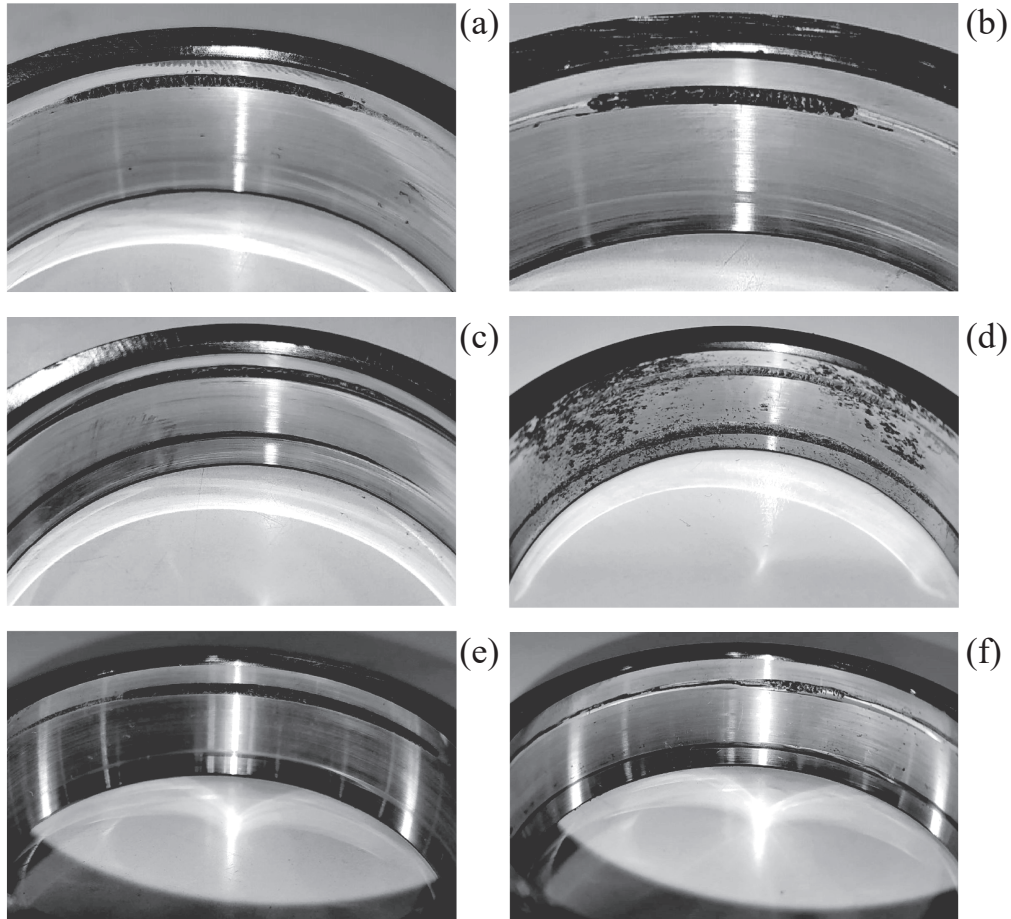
Photos of the bearing outer rings at the end of the run-to-failure tests: (a) E₁ (4 kN); (b) E₂ (4 kN); (c) E₃ (4 kN); (d) E₄ (3 kN); (e) E₅ (4.7 kN); (f) E₆ (5 kN).
